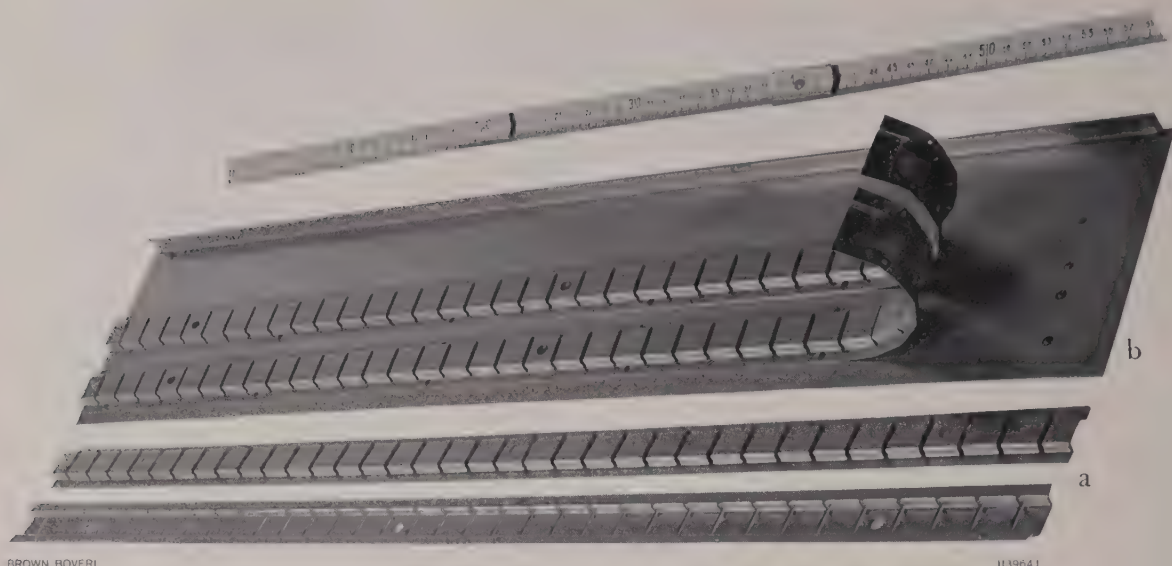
Typical case for projection welding on long batch-produced parts of mild sheet-steel
